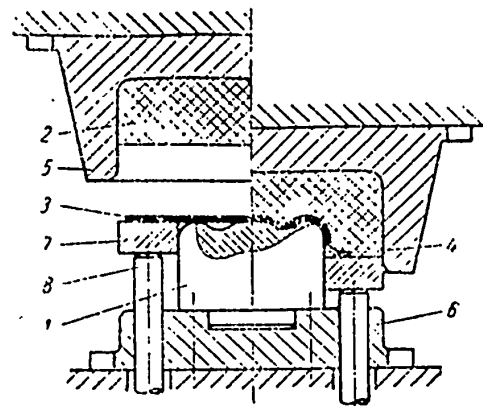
A Drawing Die with a Rubber Matrix and Steel Plunger
